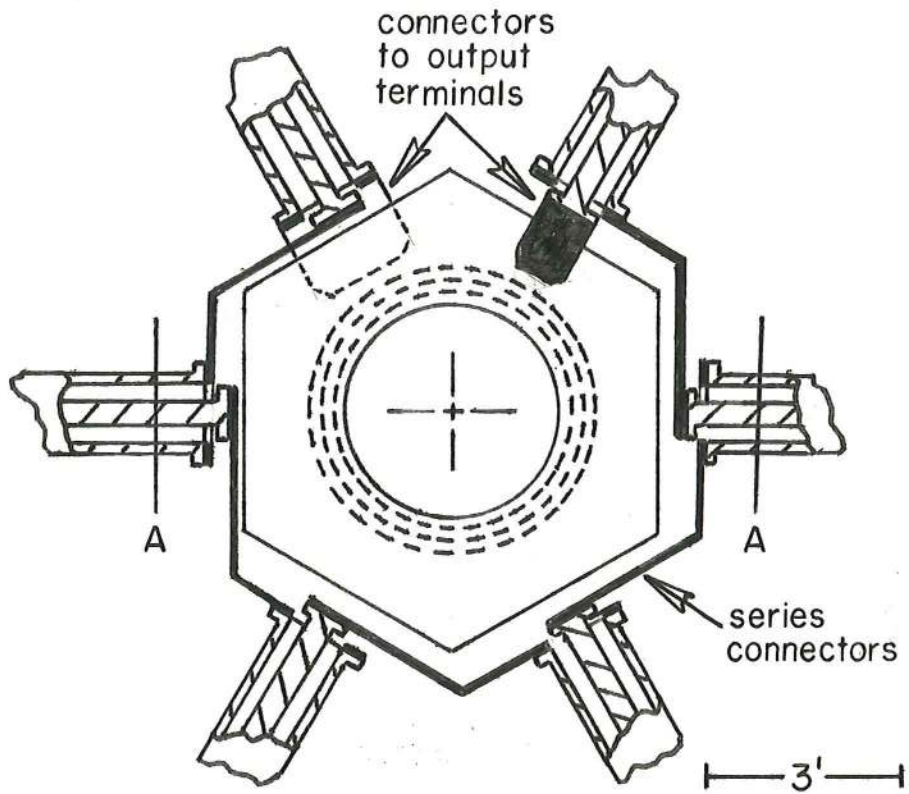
Detail of output terminal connections for series arrangement (section A-A from fig. 5b)
